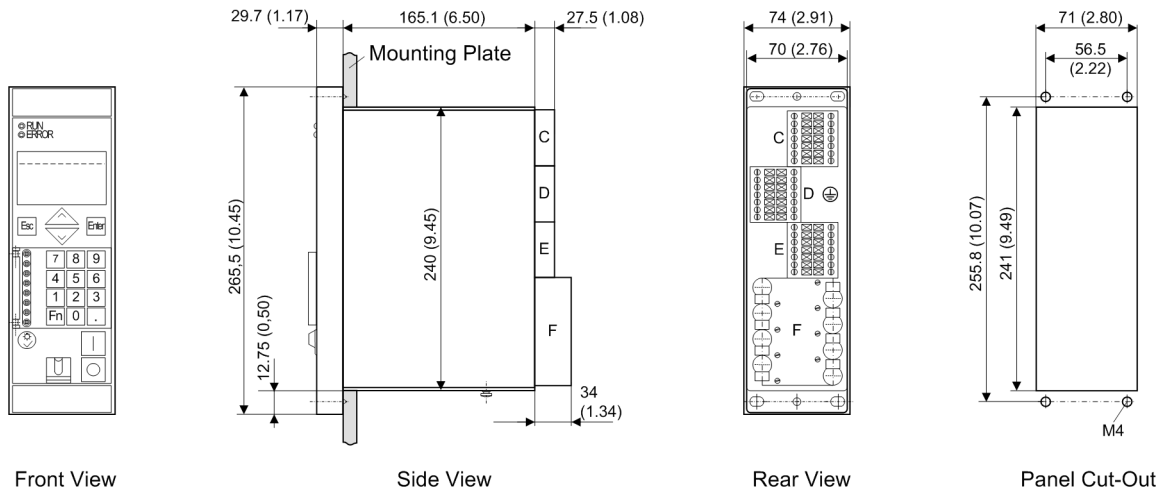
Dimensional drawing of a 7SJ80 for panel flush or cubicle mounting (housing size 1/6)
